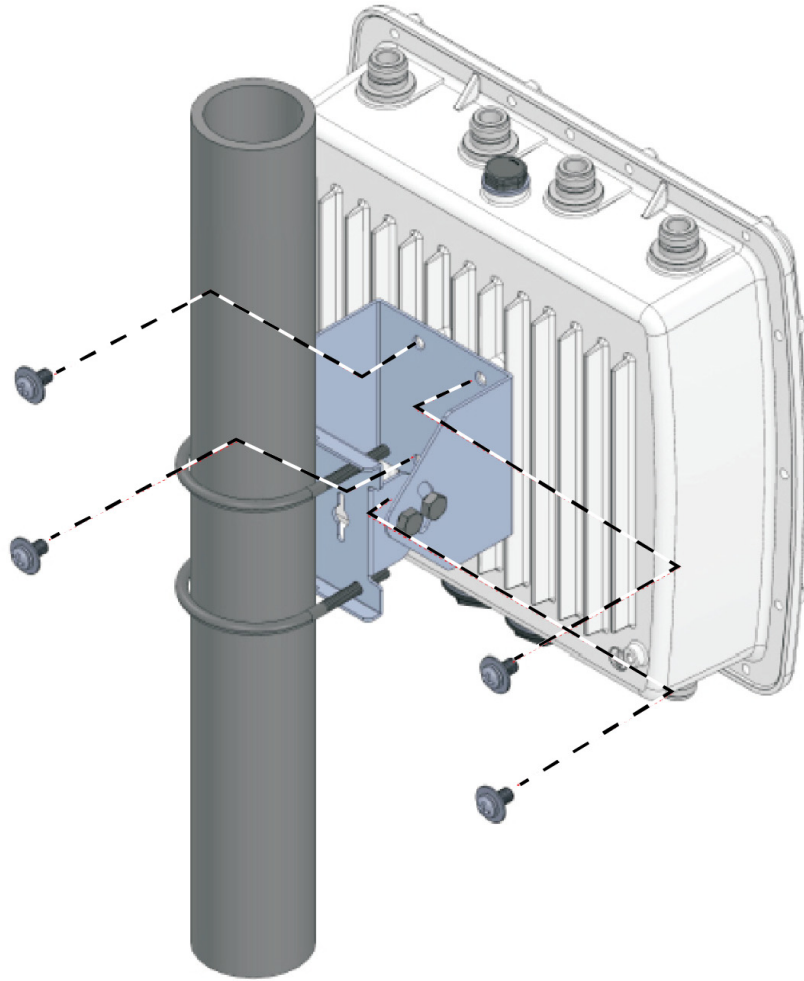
Attaching the Access Point to the Pole-Mount Brackets
